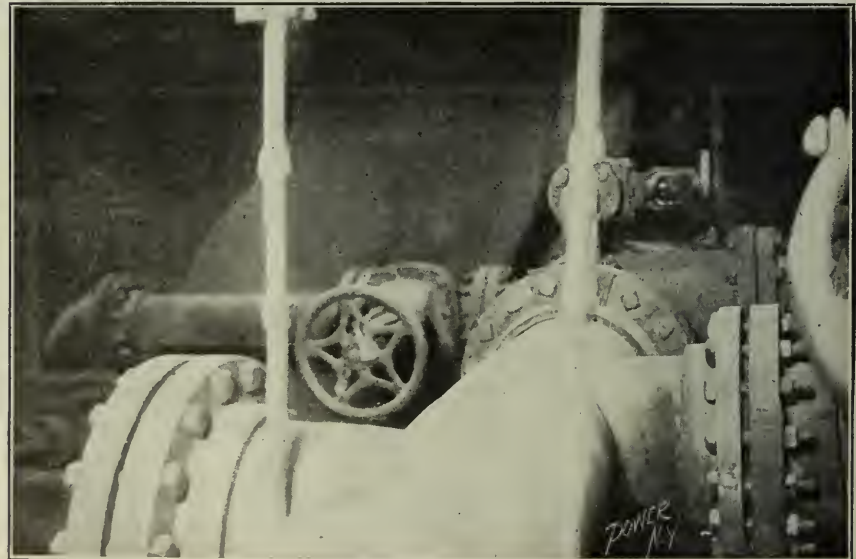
ANOTHER SAMPLE OF NOZZLES WELDED TO HEADER
